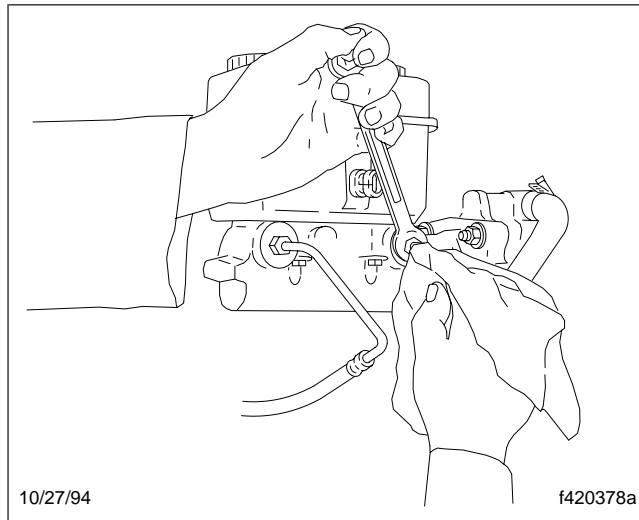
, Loosen the Fitting at the Rear Outlet Port
